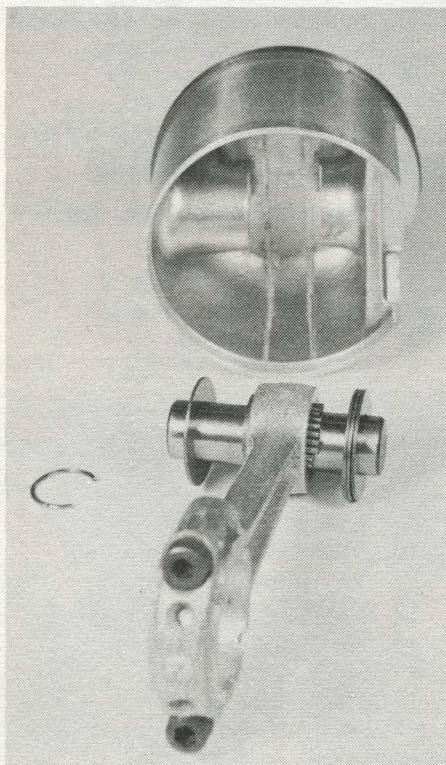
Piston and rod ready for assembly. The bearing arrangement will run many hours.
